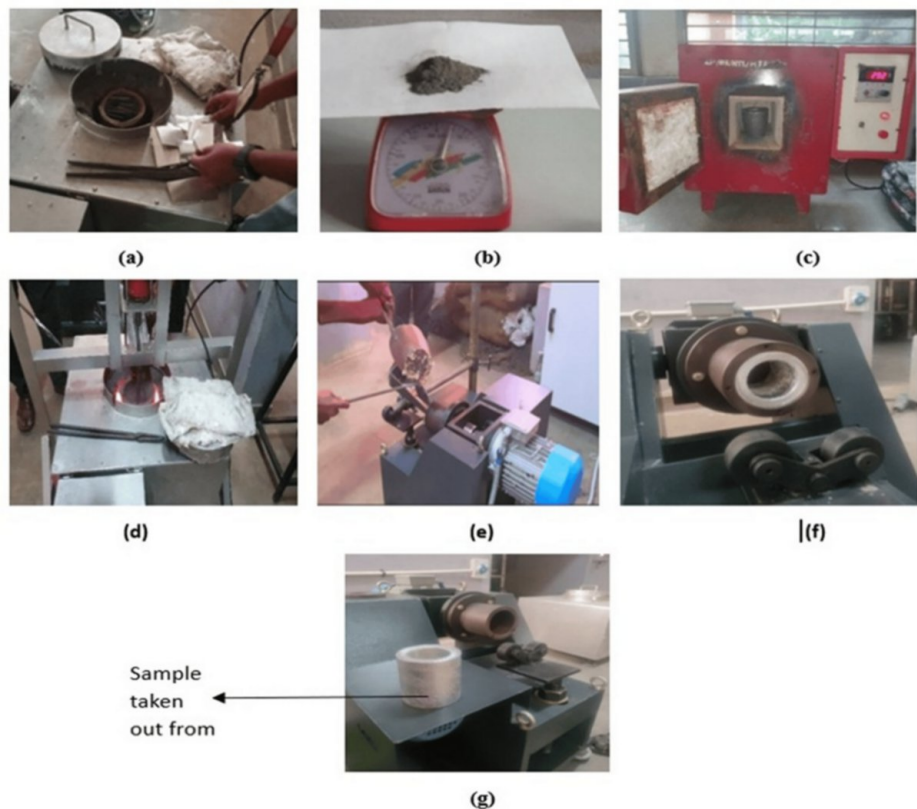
Experimental setup and process sequence of Al-SiC composite fabrication using the developed centrifugal casting machine: (a) Cut pieces of aluminium placed in the melting furnace, (b) Weighing of SiC reinforcement, (c) Preheating of SiC particles to 250°C, (d) Stirring of molten aluminium with SiC using a mechanical stirrer, (e) Pouring of the molten Al-SiC mixture into the rotating mould through the pouring mechanism, (f) Produced functionally graded composite (FGC) sample inside the mould, (g) Extracted FGC sample after cooling.
